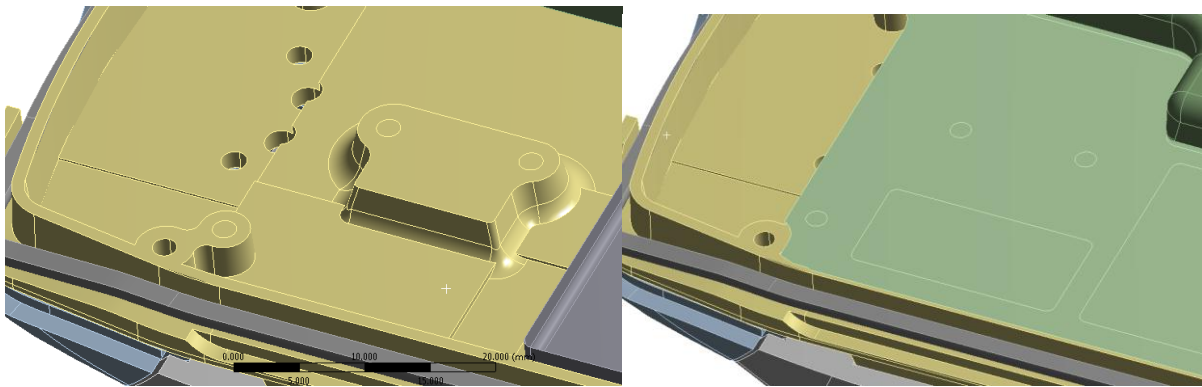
Setup of chassis and RF board to be able to apply a face to face contact condition at screw locations
